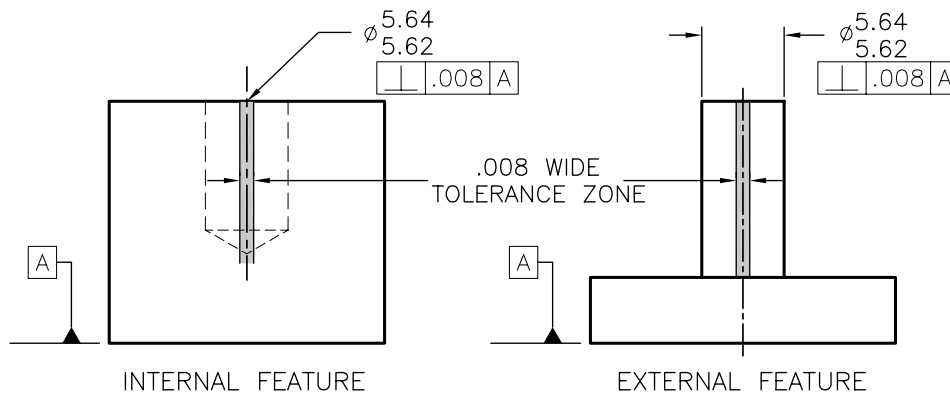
Perpendicularity tolerance zone in cylindrical features
